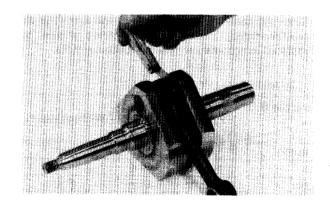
Crankshaft/Crankcase Disassembly/Reassembly
